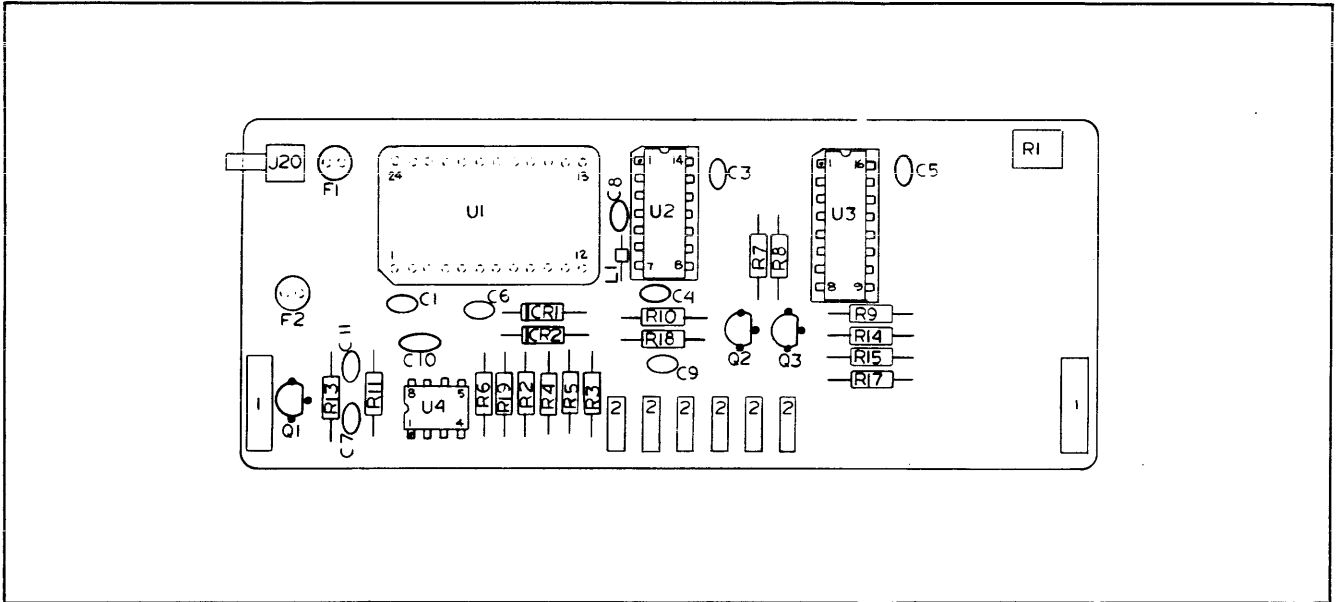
A15 1250 MHz Prescaler PCB Assembly
